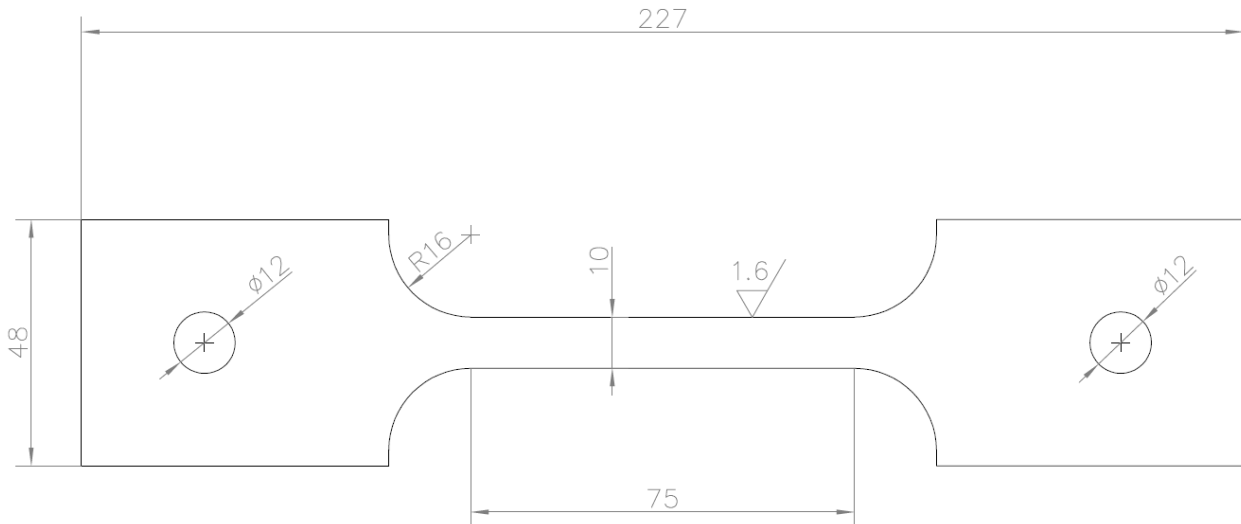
Test piece used in the long-term creep tests. Dimensions given in mm.
